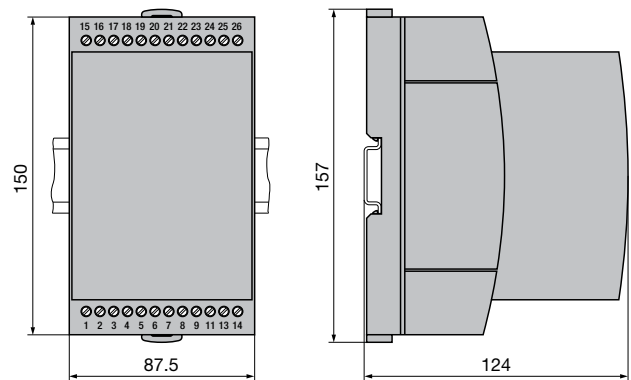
SINEAX DME in housing T24 clipped onto a top-hat rail (35×15 mm or 35×7.5 mm, acc. to EN 50 022).
